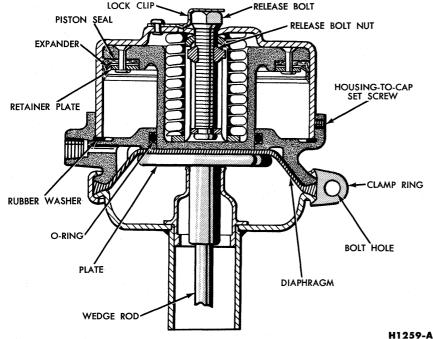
Spring Manually Compressed for Removal and Repair of Fail-Safe Unit
